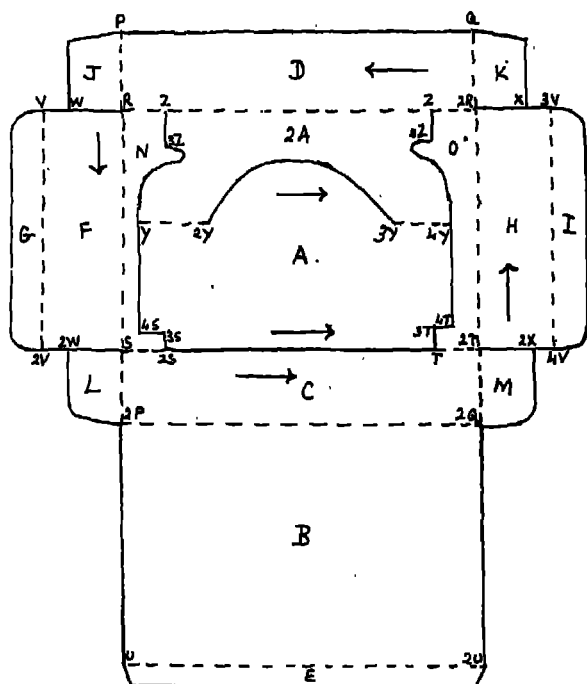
SINGLE-PIECE OUTER FOR TINS OF TOOTH POWDER.
